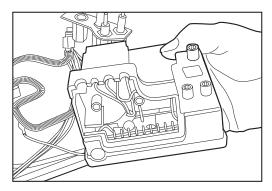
Module can now be removed. Note: The control module is held down by double-sided tape and should be gently forced upwards to release.
